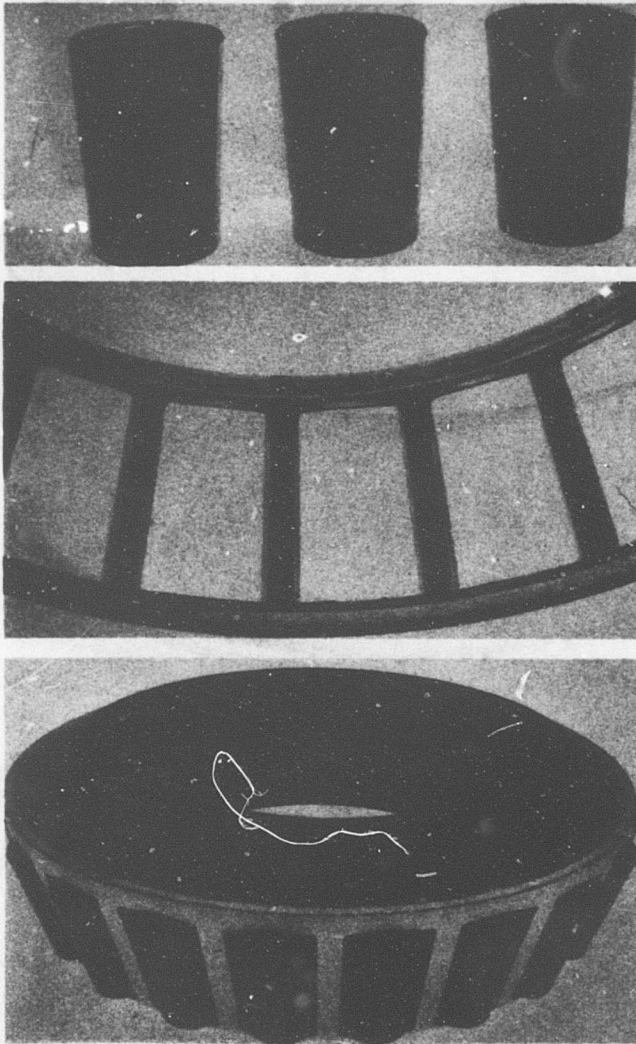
HM926700-Series Bearing After Test, Bearing No. T-6, Test No. 23--Damaged While Accelerating to 10,000 rpm.
